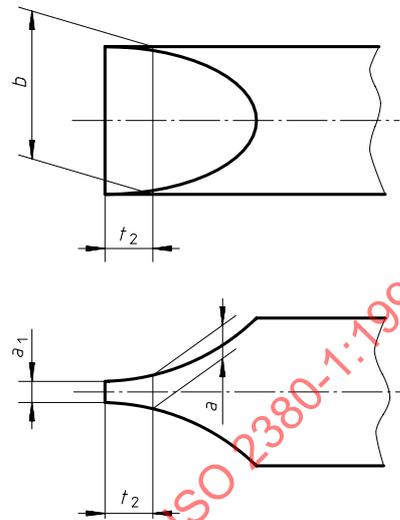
Type B, for hand-operated screwdrivers and Type C for machine-operated screwdrivers
